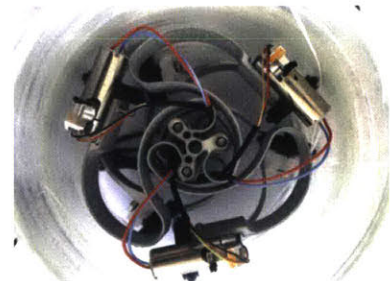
Water jet aluminum flexure base drive assembly using geared brushed DC motors, delrin wheels, BunaN O-rings.
